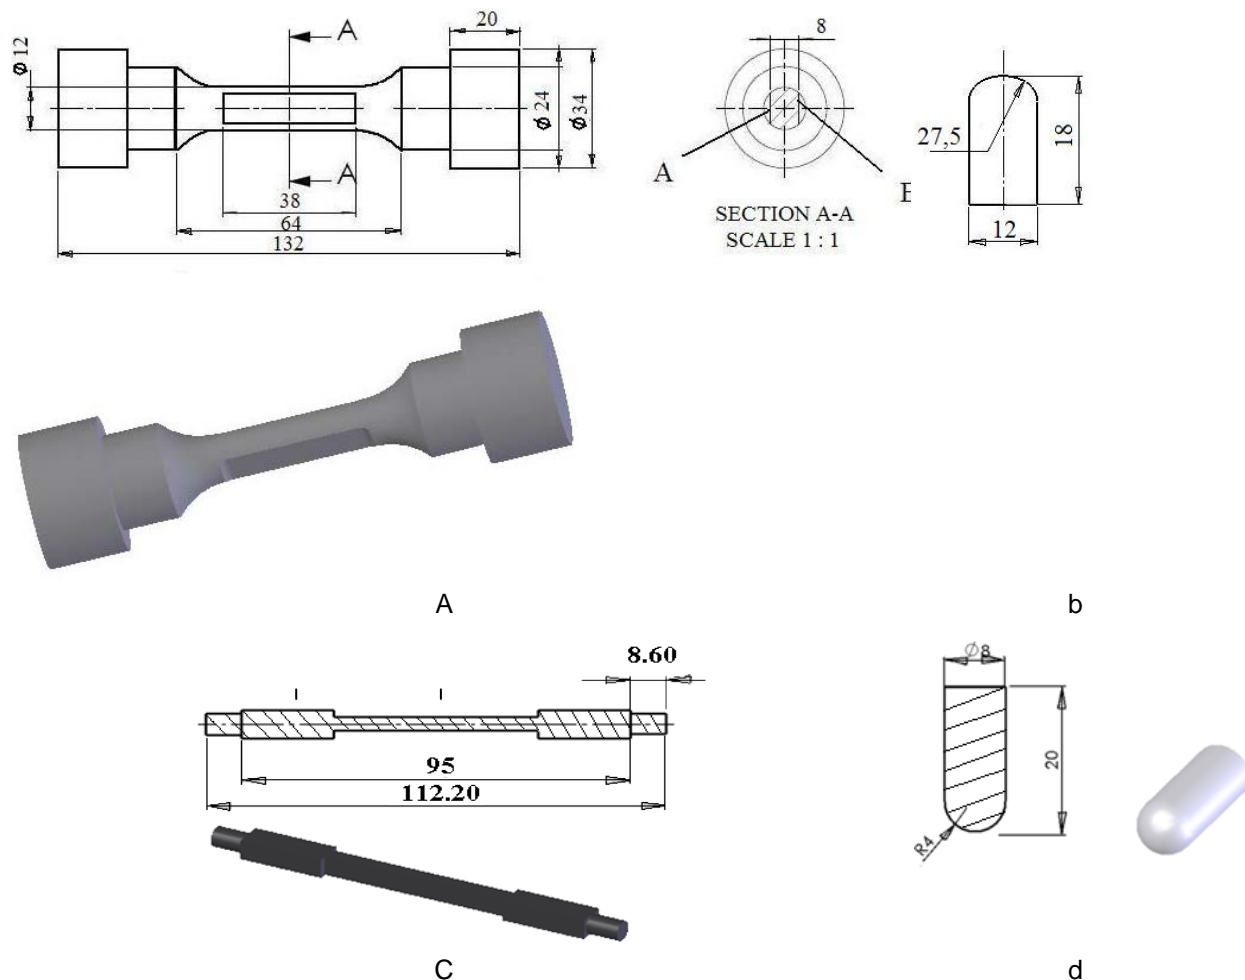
Geometry of the specimens and pad/pin: a. specimen used in plain fatigue and fretting fatigue tests; b. pad used in fretting fatigue tests; c. specimen used in reciprocating wear test; d. pin used in reciprocating wear test [124,167-172]
